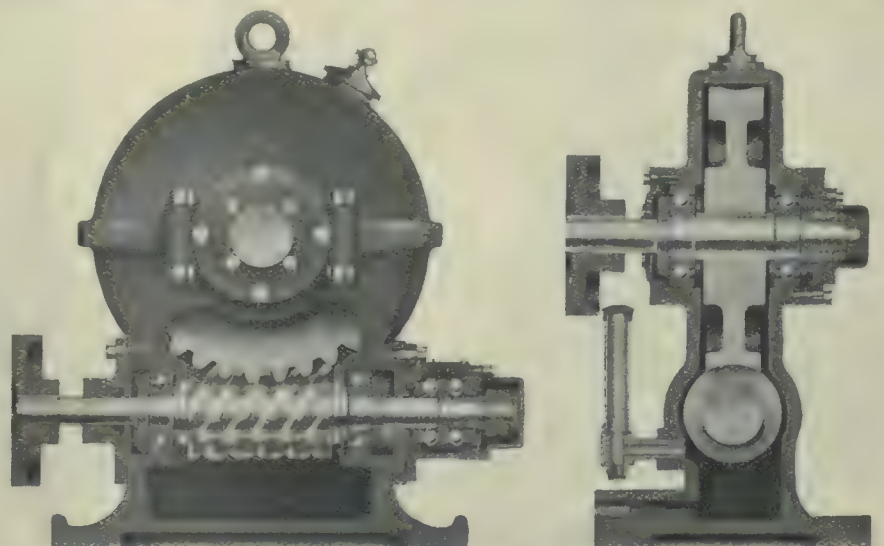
Application of Hoffman Double Ball Bearings to Worm Gear.
